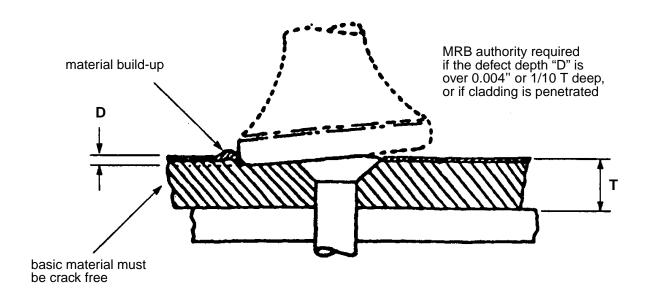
SNAP MARK DAMAGE AROUND FLUSH HEAD FASTENERS
